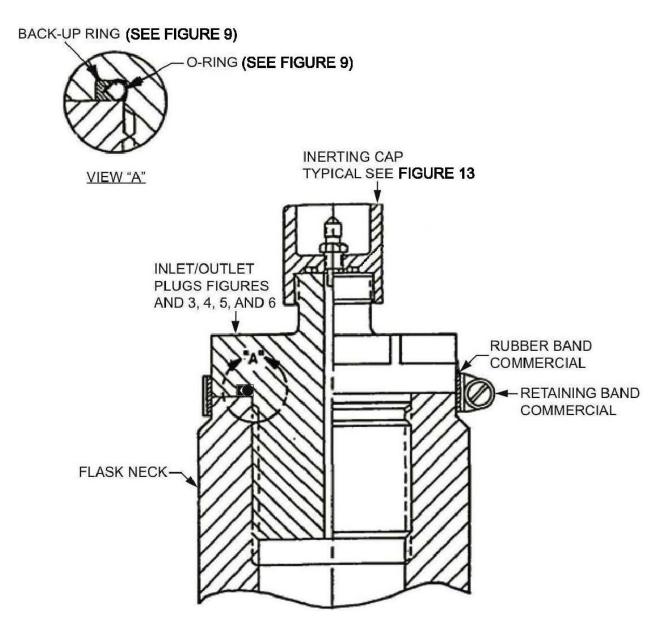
Assembly of o-ring sealed inlet/drain plug.
